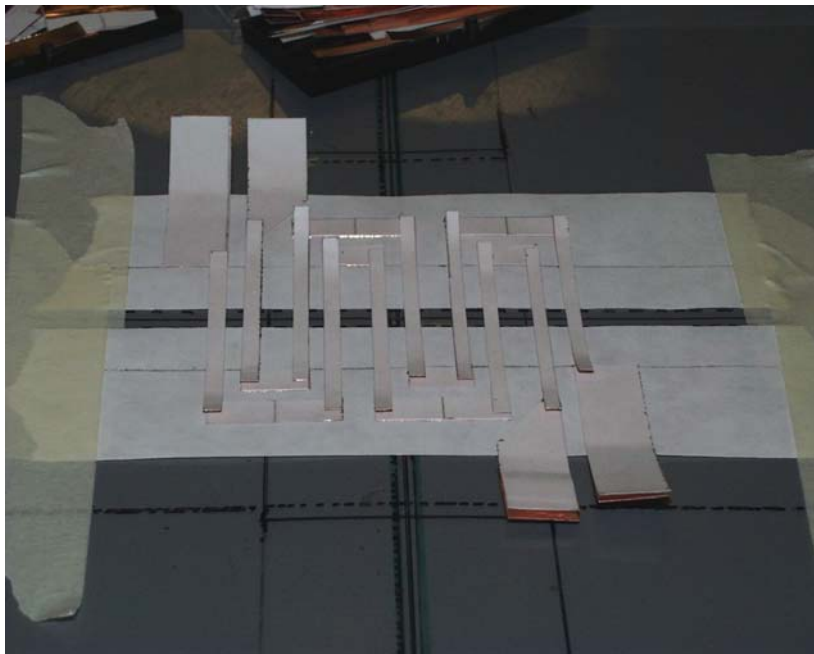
Completed Layout of Serpentine on Low-tack Masking Tape
